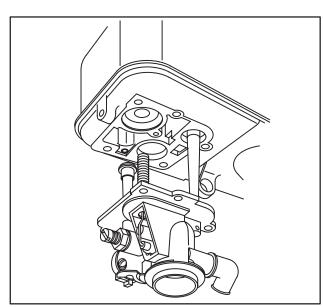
ASSEMBLING TANK TO CARBURETOR
